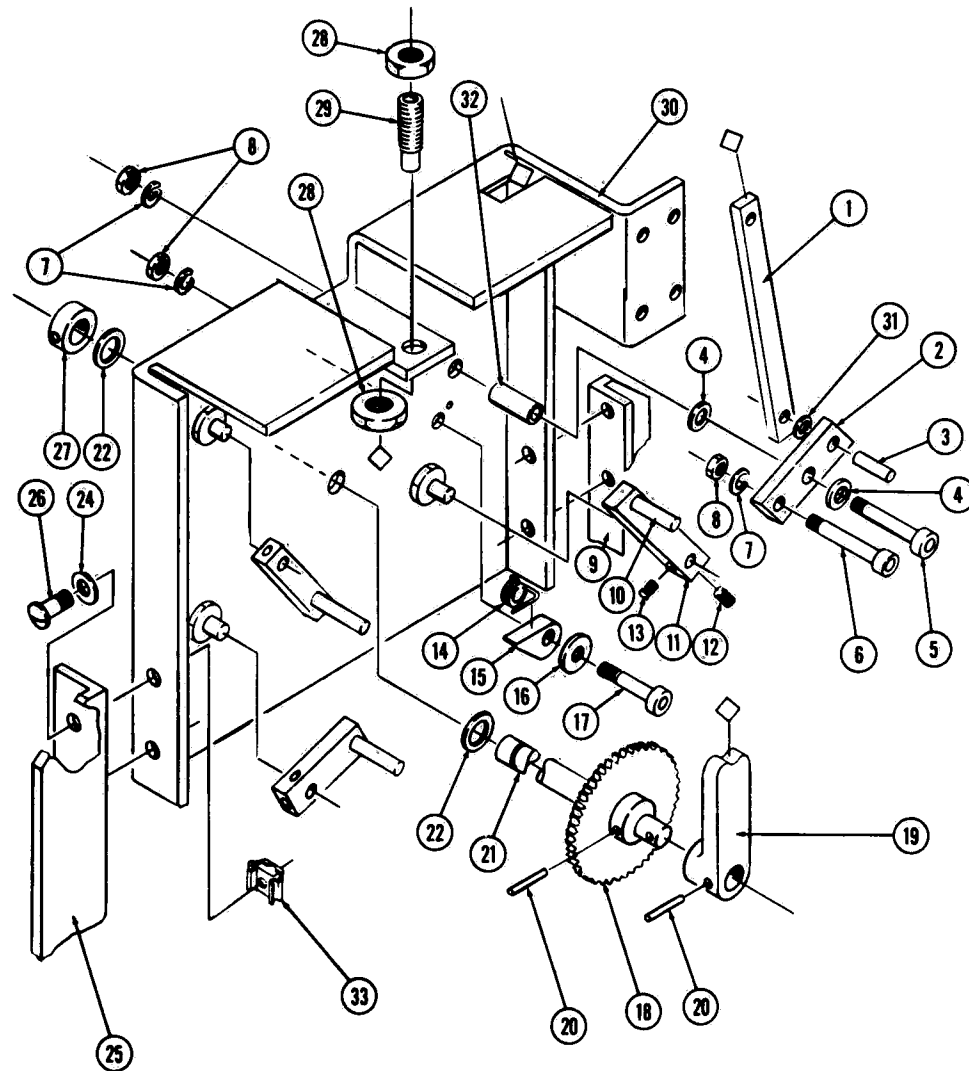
MANUAL CONTROL ASSEMBLY: Door Lock (Part 1 of 2).
